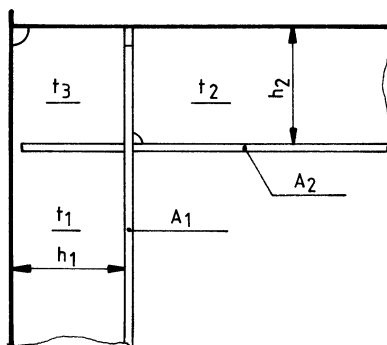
Bracketless connection of primary supporting members
